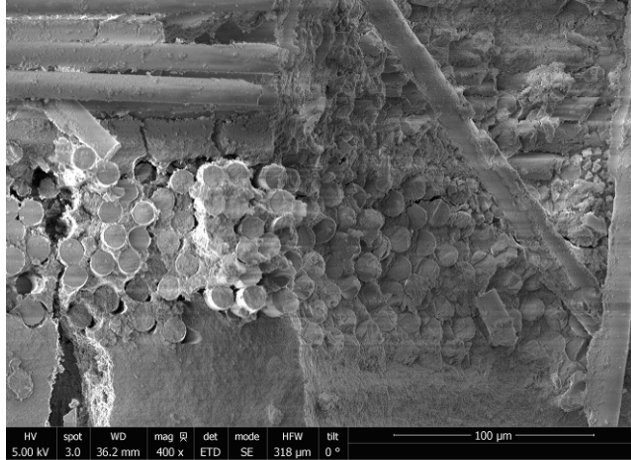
Fracture surface of specimen #7, tested in tension to failure following 100 h creep at 46 MPa at 1200°C in air
